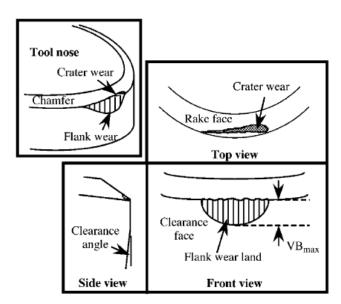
A drawing showing typical tool wear in finish turning and the definition of VB and  $VB_{max}$  [2, 3]
